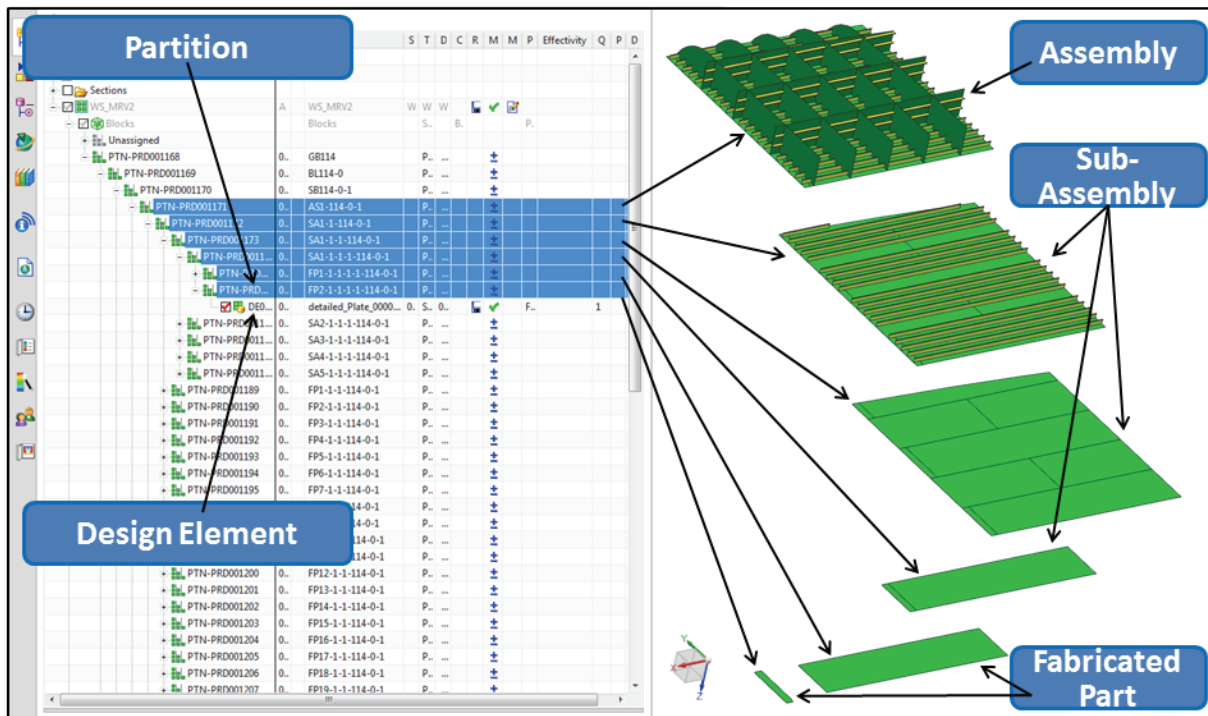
PWBS for the MRV showing Assembly, Sub-Assemblies, and Fabricated Parts (up to the Design Element level)
